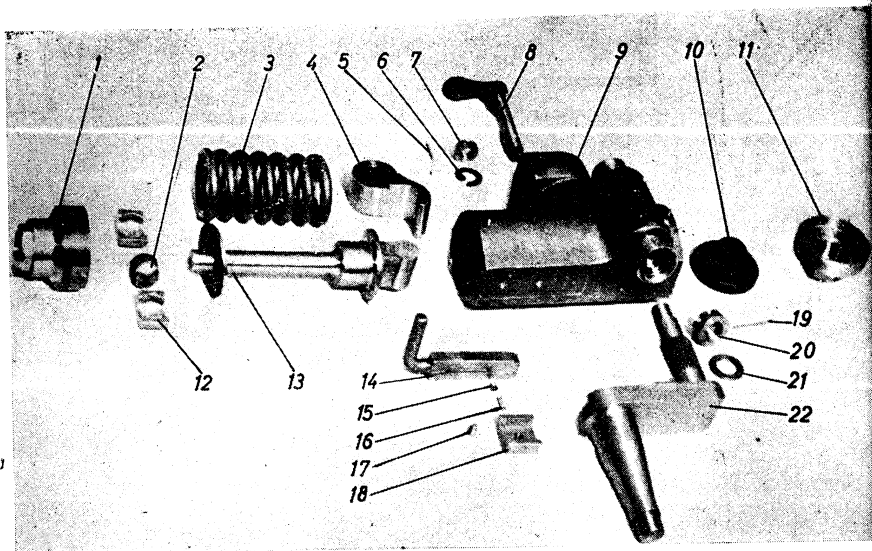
SPRING ASSEMBLY B-1 A2, B-1A1-I
